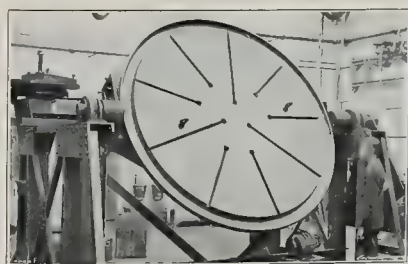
GRINDING MACHINE WITH TABLE TILTED
